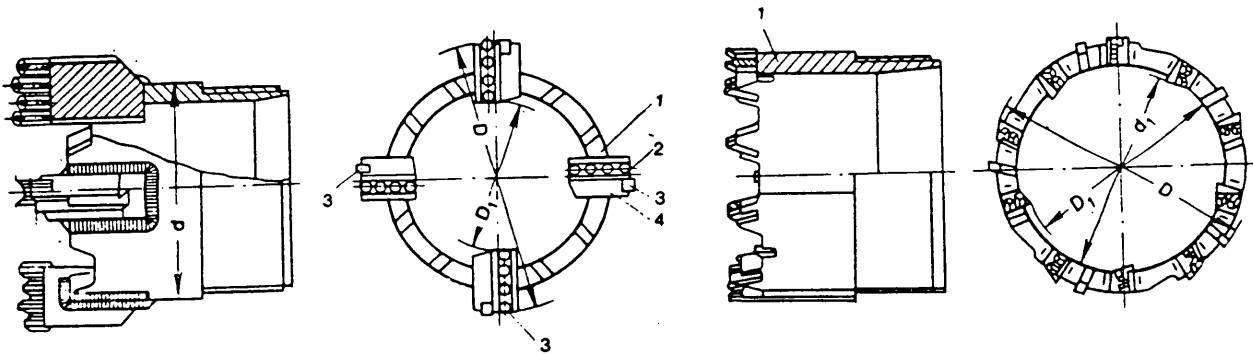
Tungsten Carbide-insert bits. 1- bit blank; 2- main (face) cutter; 3- reaming (gauge) cutter; 4- setting plate
